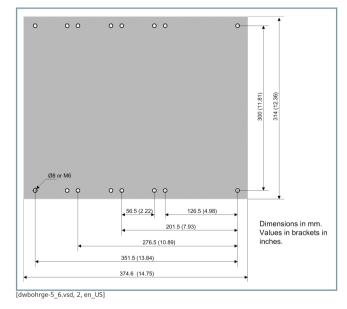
/26 Drilling Pattern of a 5/6 Surface-Mounted Device – 1st Device Row
